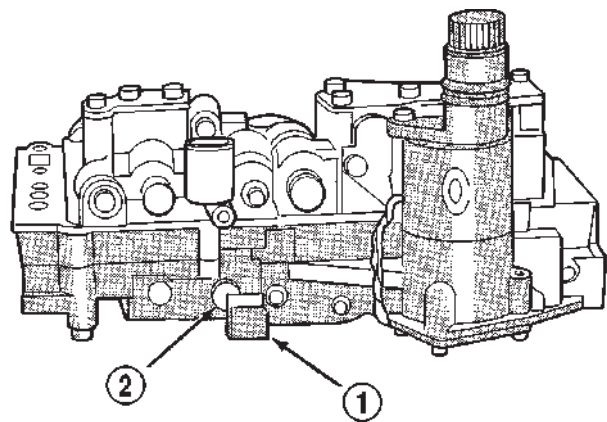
Converter Clutch And 3-4 Shift Valve Springs
